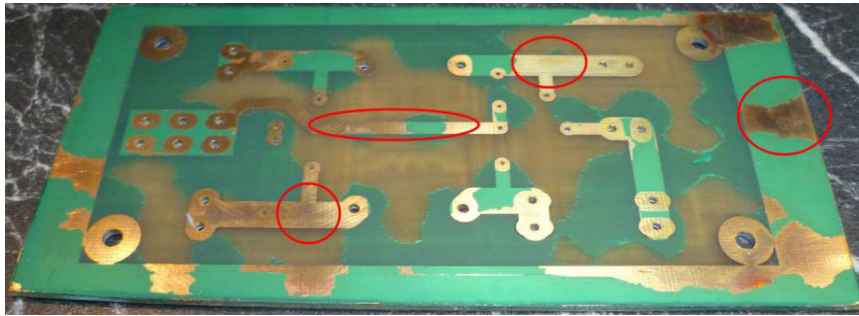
Printed circuit board with missing solder mask (examples are circled).
